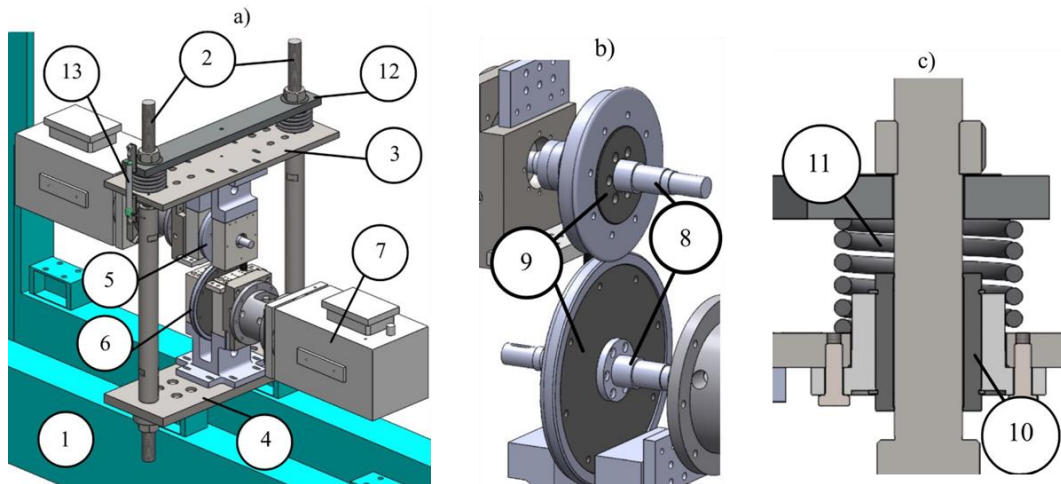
A: (a) CAD model of the novel twin-disc tribometer; (b) detail of the wheel and rail rollers and, (c) detail of the helical spring and linear bearing.
